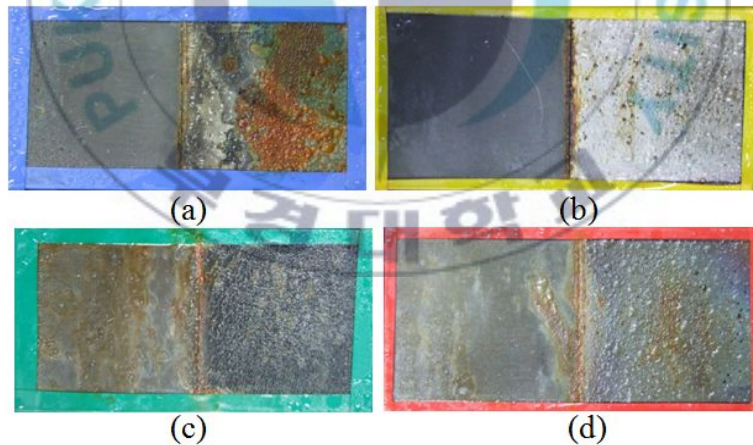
Appearance after salt spray test during 72 hours at welding specimen with LR-0727(2) coating solution. (a) SABC1470(850 °C)+SPFH590, (b) SABC1470(850 °C)+SPFC980, (c) SABC1470(950 °C)+SPFH590, (d) SABC1470(950 °C)+SPFC980
